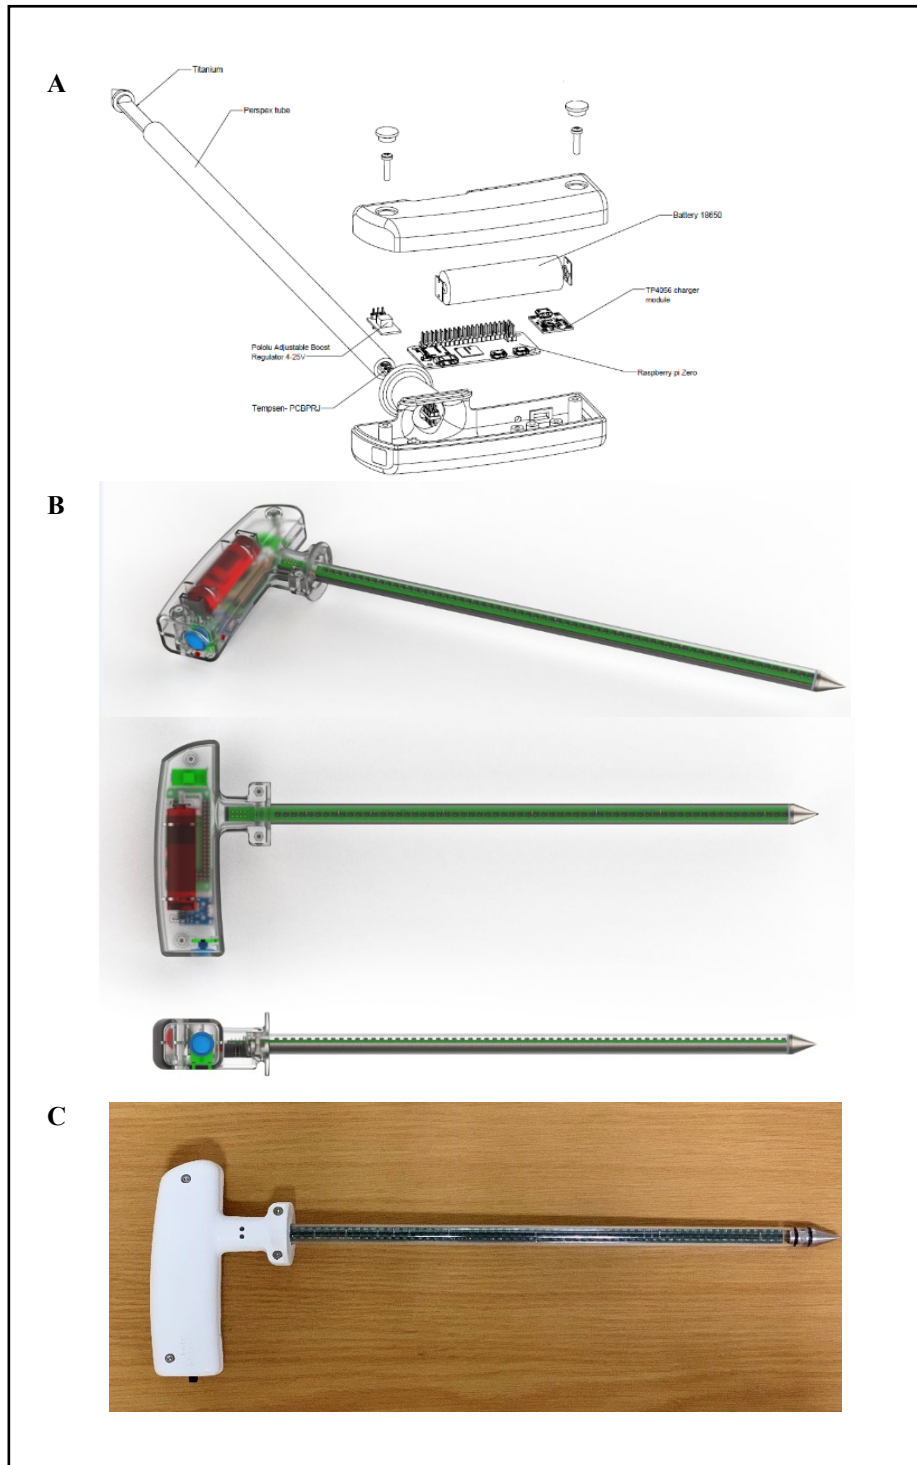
The multipoint axial thermometry device prototype. A indicates schematic drawings. B indicates photorealistic computer renditions with a translucent cover. C indicates the final fabricated prototype.
